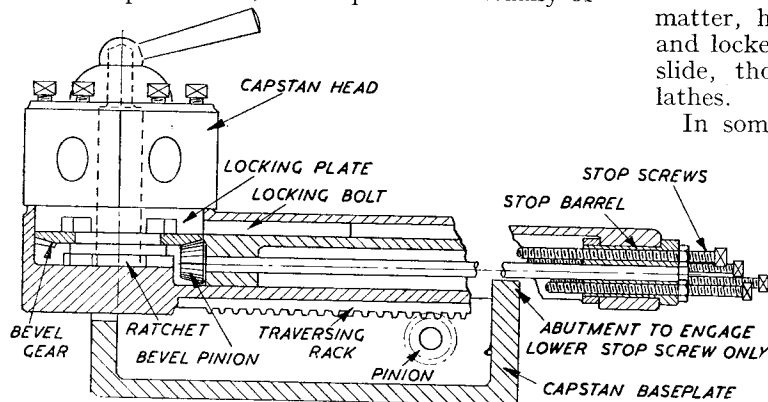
Section of capstan slide, showing geared stops, also indicating relative positions of locking and indexing gear.
